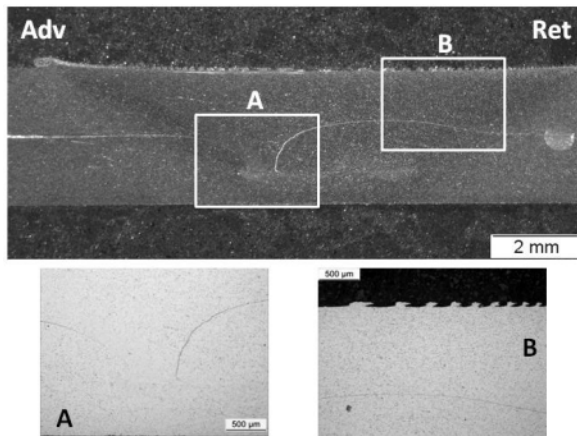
Cross-section of FSW lap joint performed with a non-threaded - 2,5 mm long probe tool at 1500 rpm - 150 mm/min.
